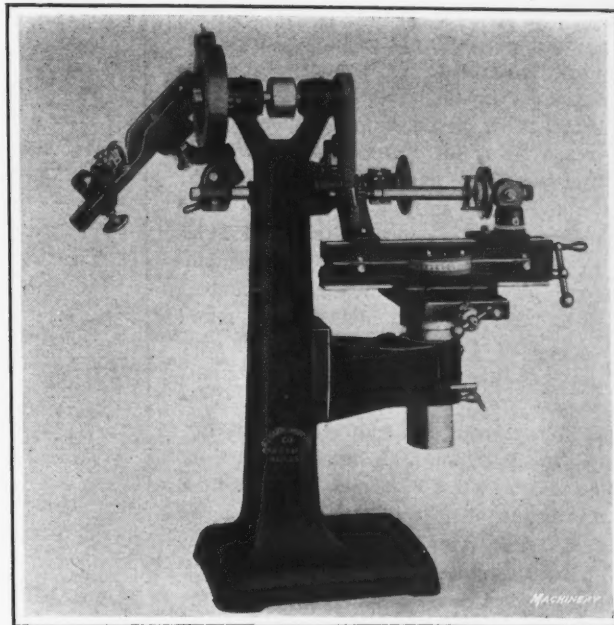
Wilmarth & Morman No. 0 Universal Cutter, Reamer, and Drill Grinding Machine. In this View the Machine is shown equipped for Belt Drive
